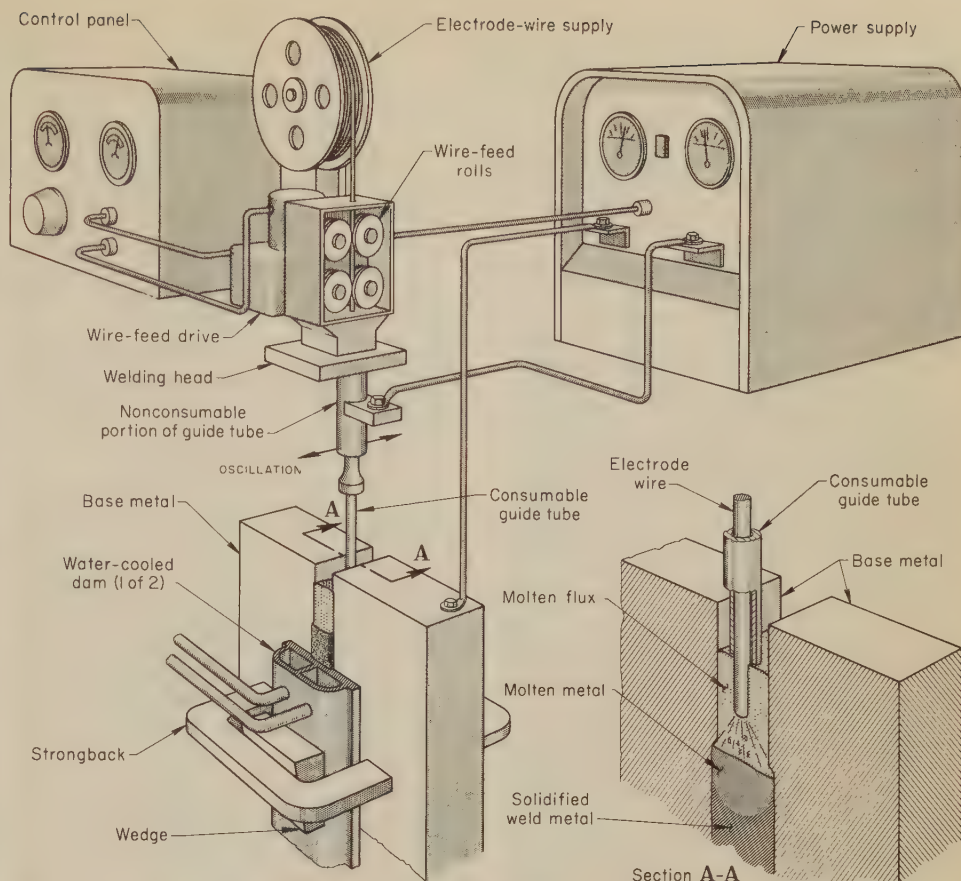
Principal components and setup of equipment for electroslag welding with the consumable-guide-tube system
